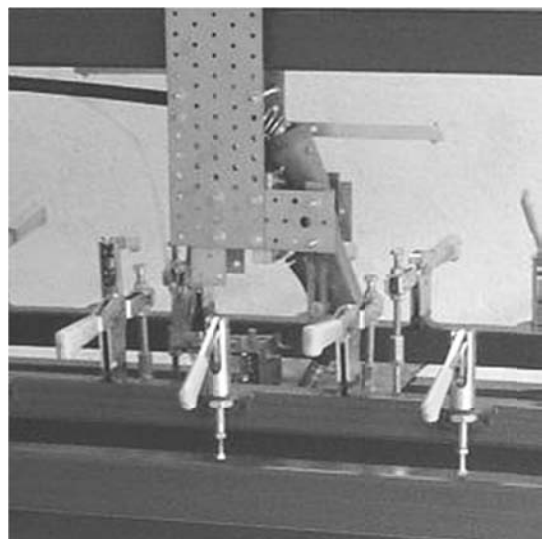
Equipment for MIG welding with micro-jet cooling
